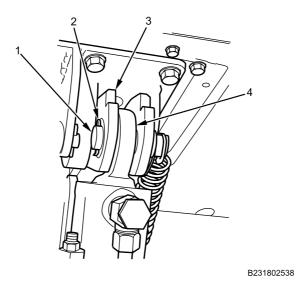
Cotter Pin and Hydraulic Cylinder Removal.
